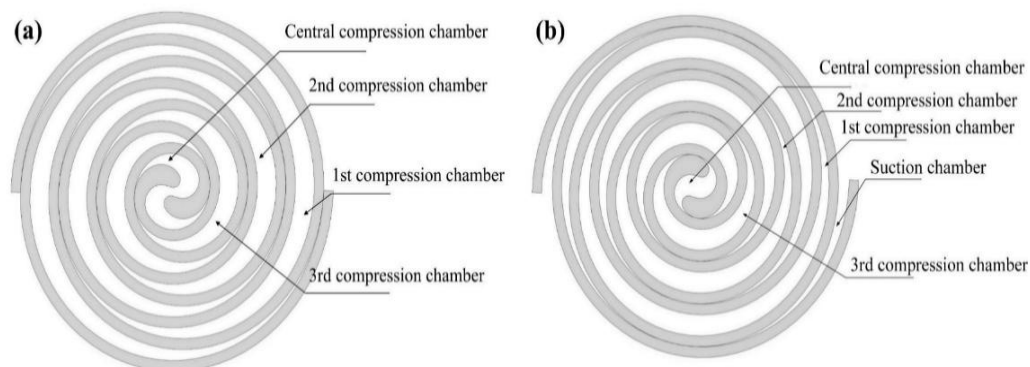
Compressor chambers at a crank angle of (a) 0° and (b) 60°.
